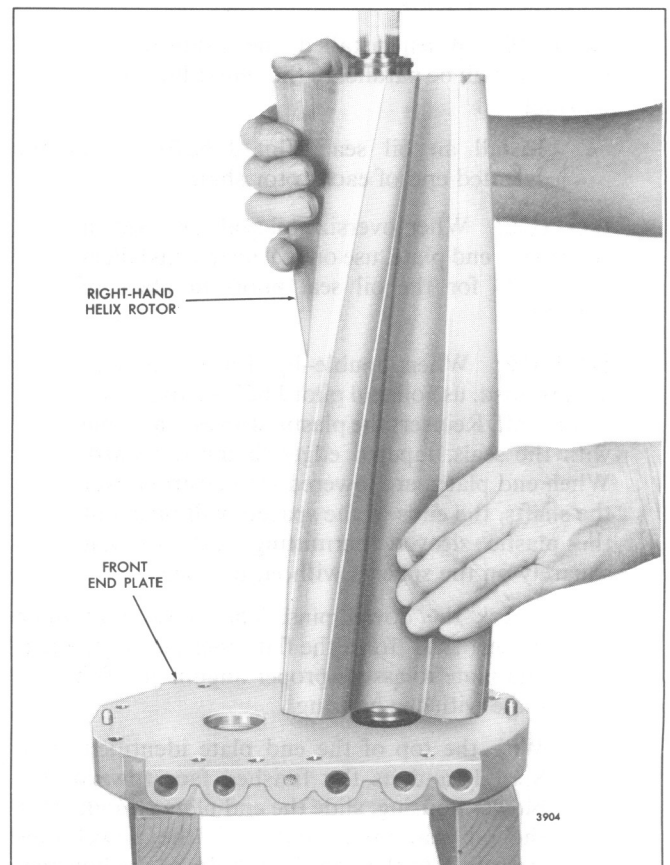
Installing Blower Rotor in Front End Plate (V-92T Blowers)
